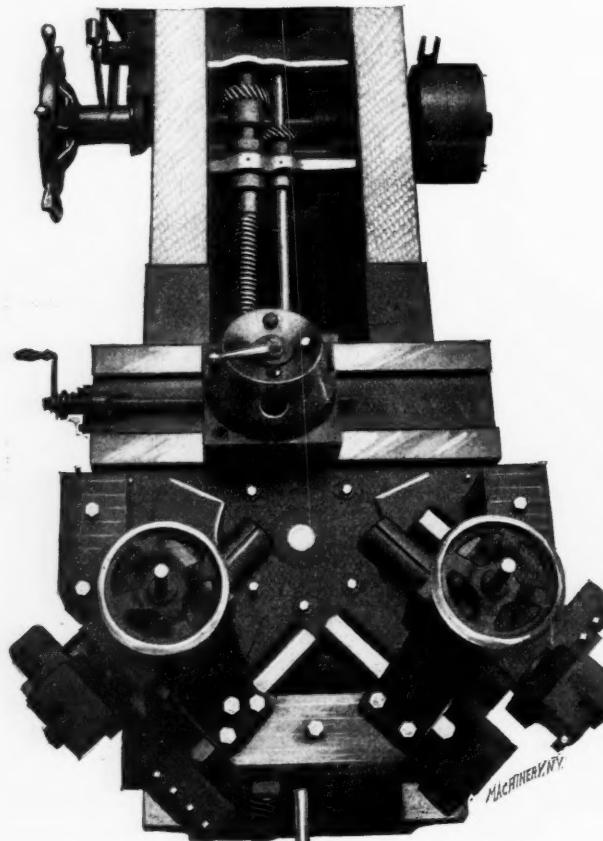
Top View of Turret and Bed of 24 inch Lathe.
